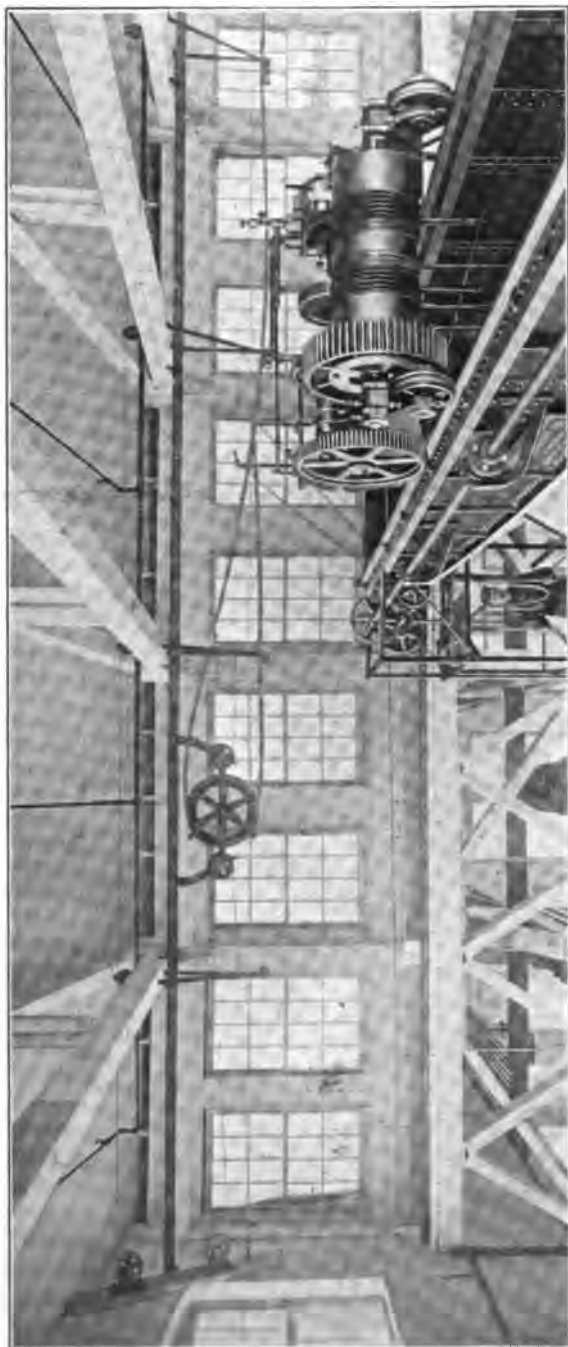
COMPRESSED AIR CRANE HOSE SUPPORT.
